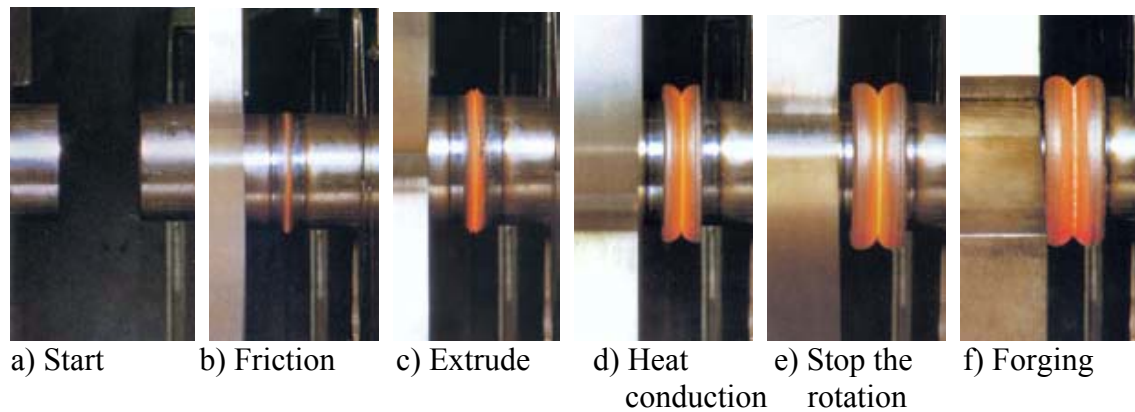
Stages of direct drive friction welding [9]
